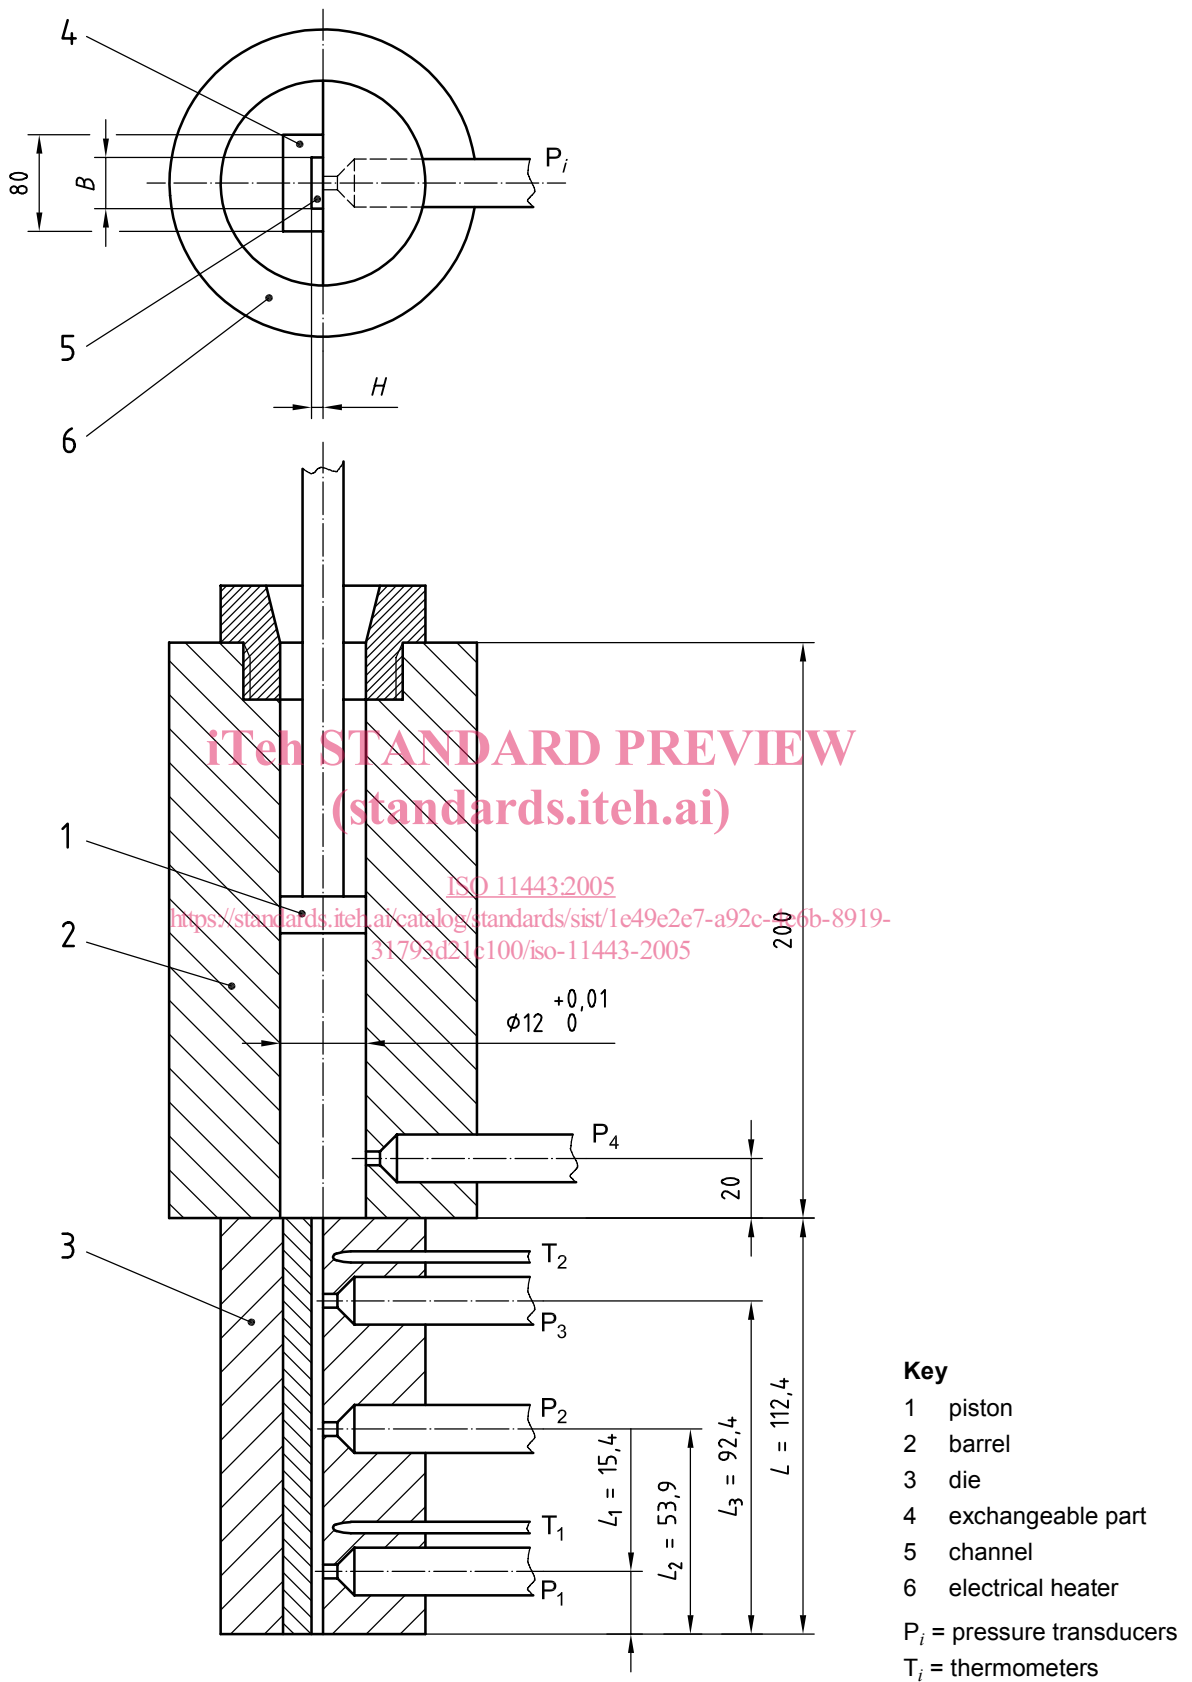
Typical example of an extrusion rheometer used with a slit die
